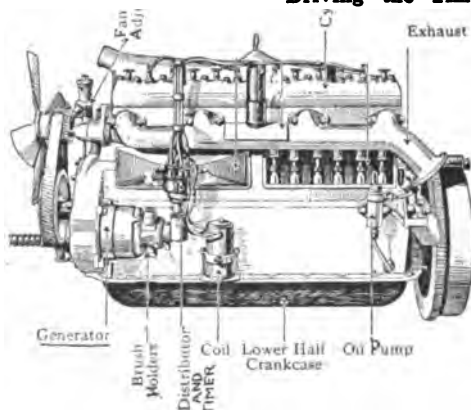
Modern method of driving the timer and distributor through the generator shaft.
